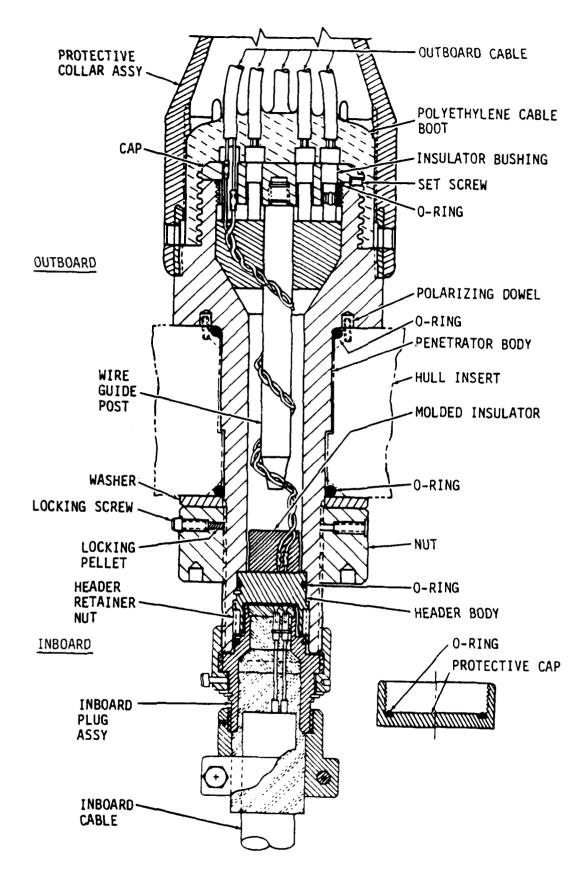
Trident polyethylene molded boot hull penetrator.
